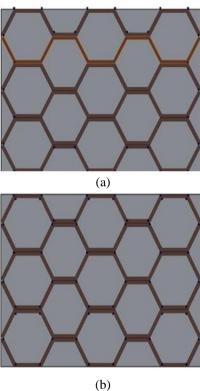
(a). Spot weld location (dark spots) between core andtop panel (b) Spot weld location (dark spots) between core and bottom panel.
